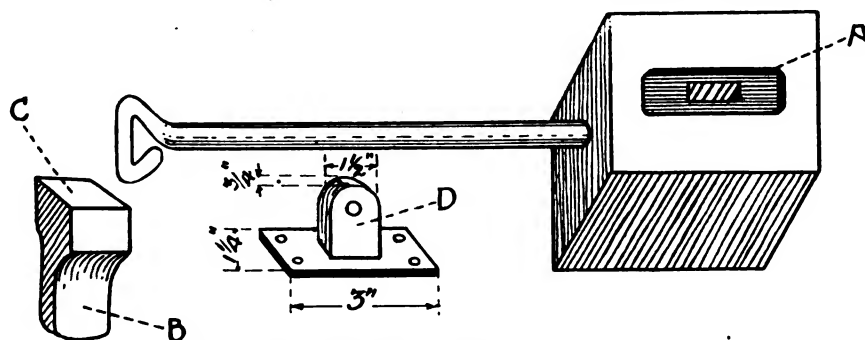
TOOL FOR STAMPING PLATE WITH LUG
